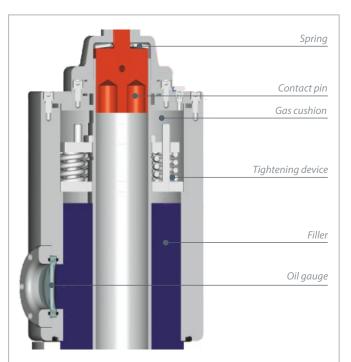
Upper part of 220 kV and higher bushings with RIP insulation and liquid filler
